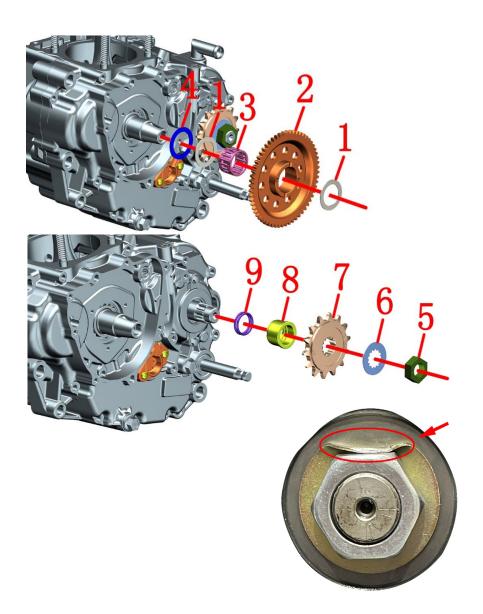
D	ISASSEMBLY	Preparation before the box is split 4
